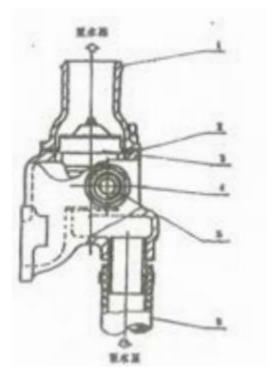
Thermostat and housing 1 thermostat cover, 2 gasket, 3 thermostat parts, 4 thermostat body, 5 temperature gauge connector, 6 hose
